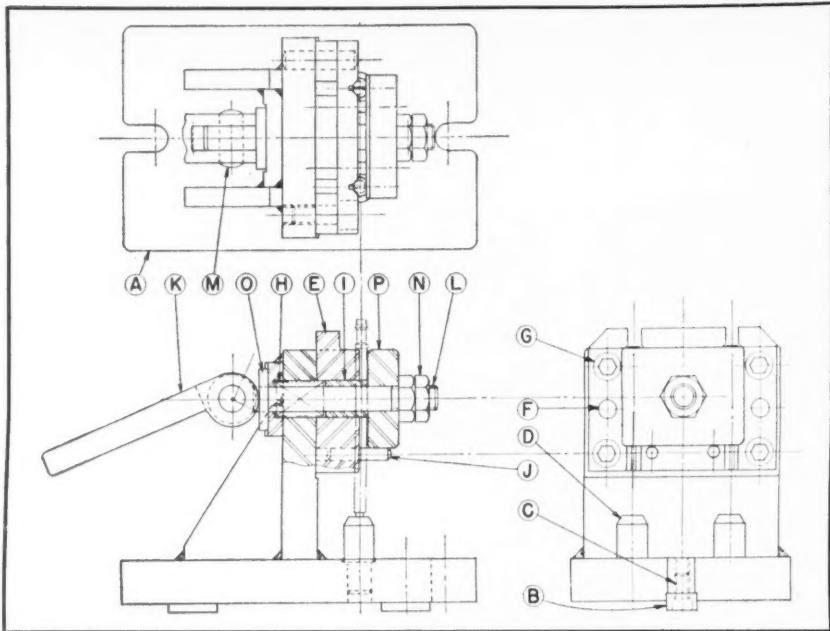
Duplex milling fixture used in slotting inlet manifold heater valve shafts of the type shown in Fig. 1.
